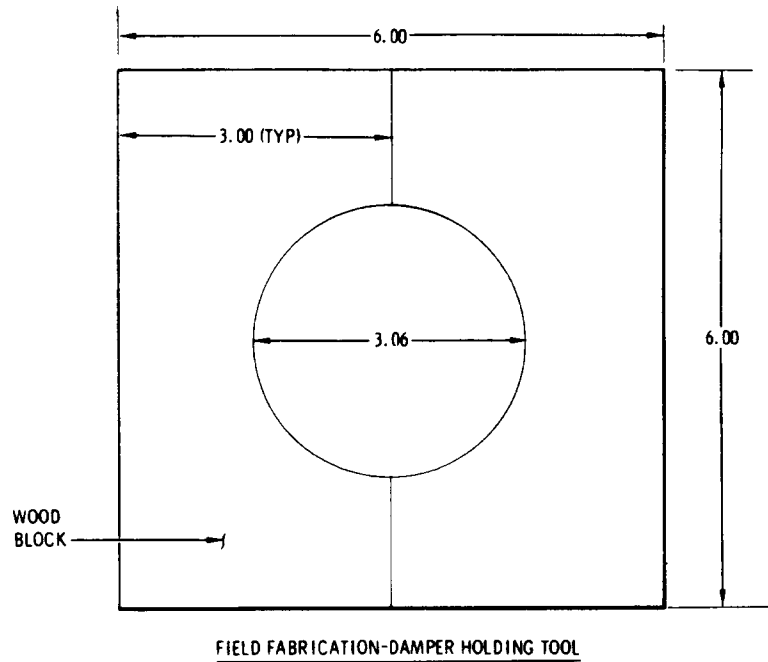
Main Rotor Damper - Internal Modification and Reidentification, M50452
